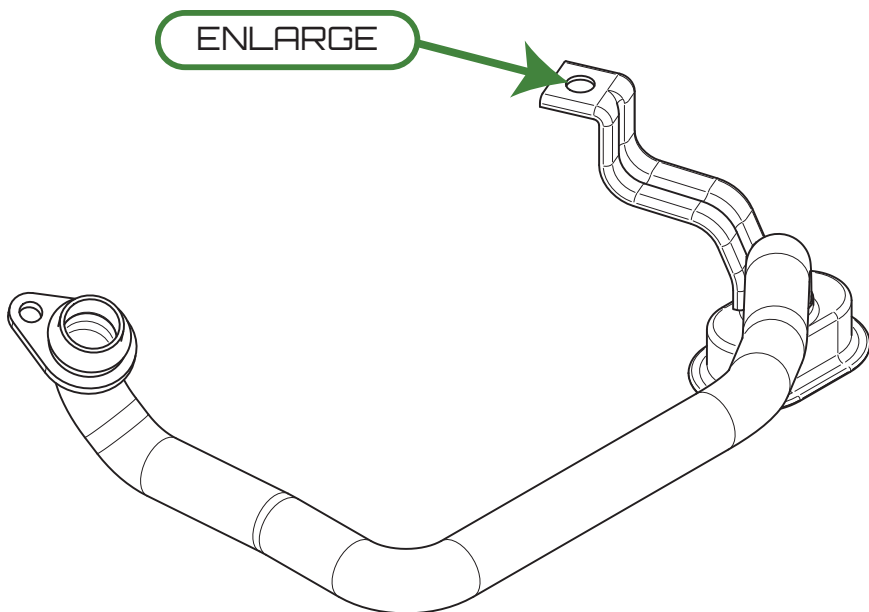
Hole to Enlarge on the Pickup Tube (Screen)
